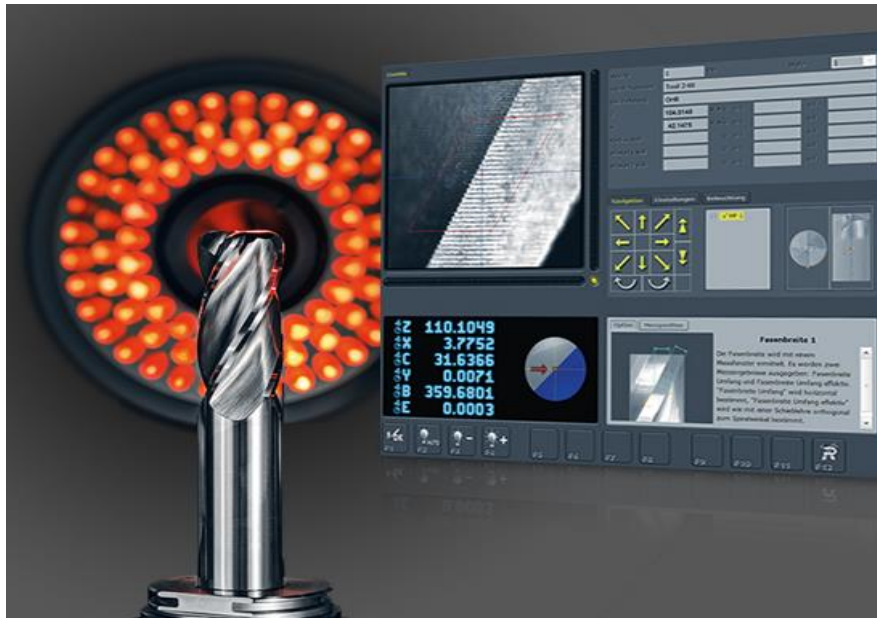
Zoller - measuring machine control (<https://www.zoller.info/en>).
